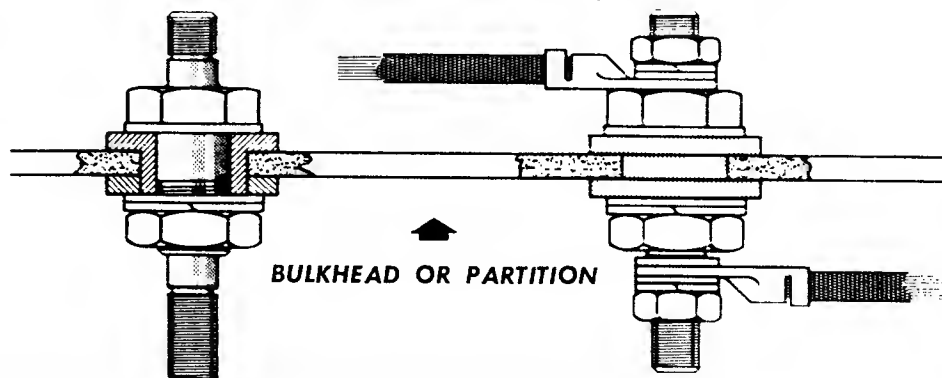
BULKHEAD THRU-LEAD: Circuits on either side can be removed without disturbing opposite connections.
